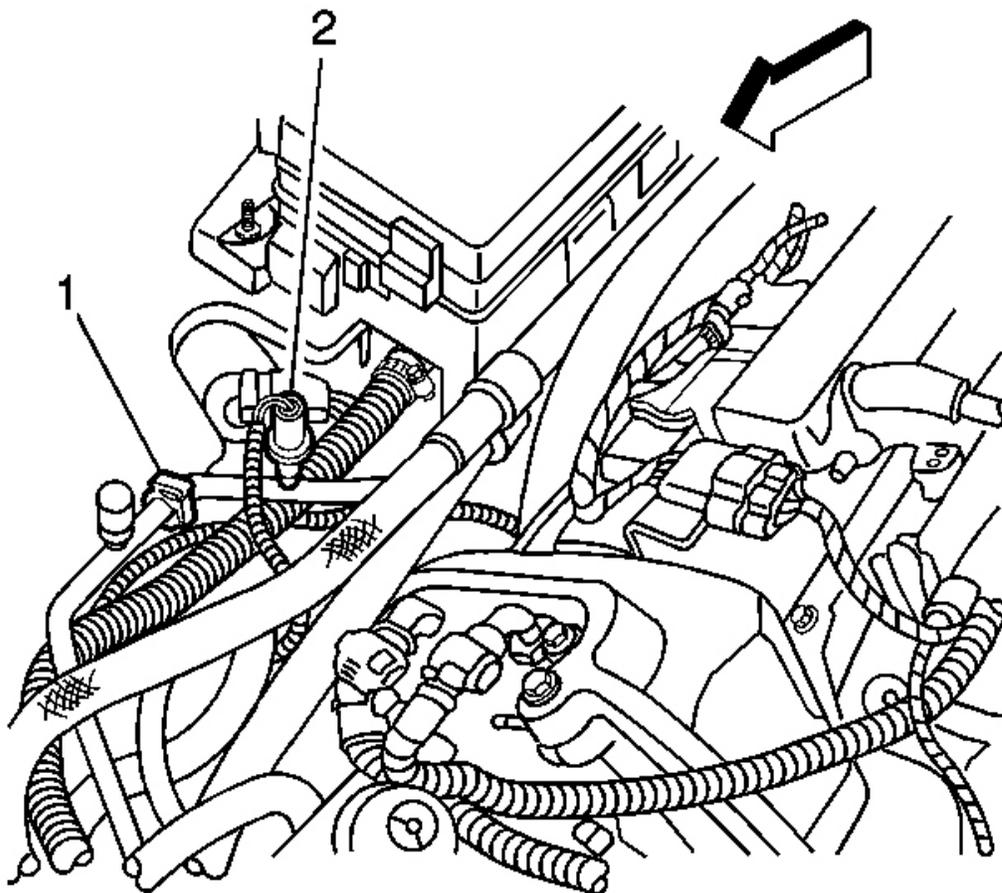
Identifying Body Retaining Clip & Refrigerant Pressure Sensor Electrical Connector
